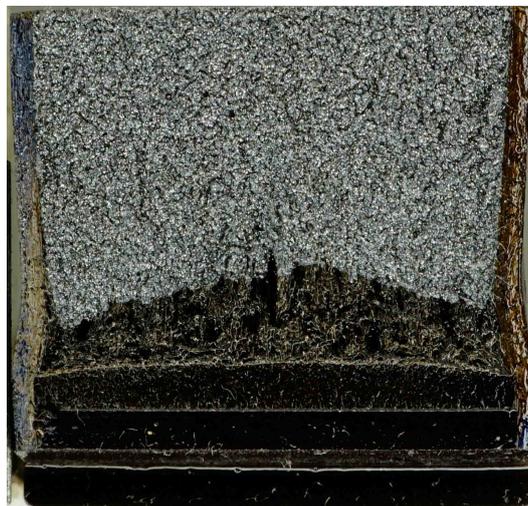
Crack surface for the specimen PVS2-NM indicating the fatigue precrack and the final crack fronts associated employed to measure ductile crack extension
